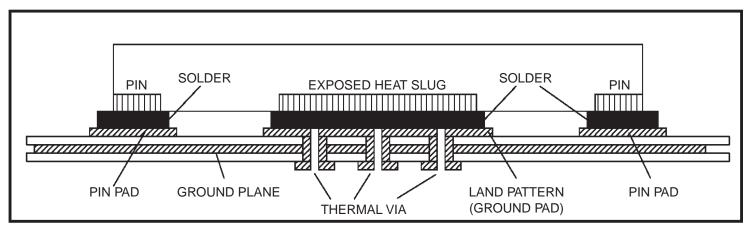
P.C. Assembly for Exposed Pad Thermal Release Path – Side View (drawing not to scale)
